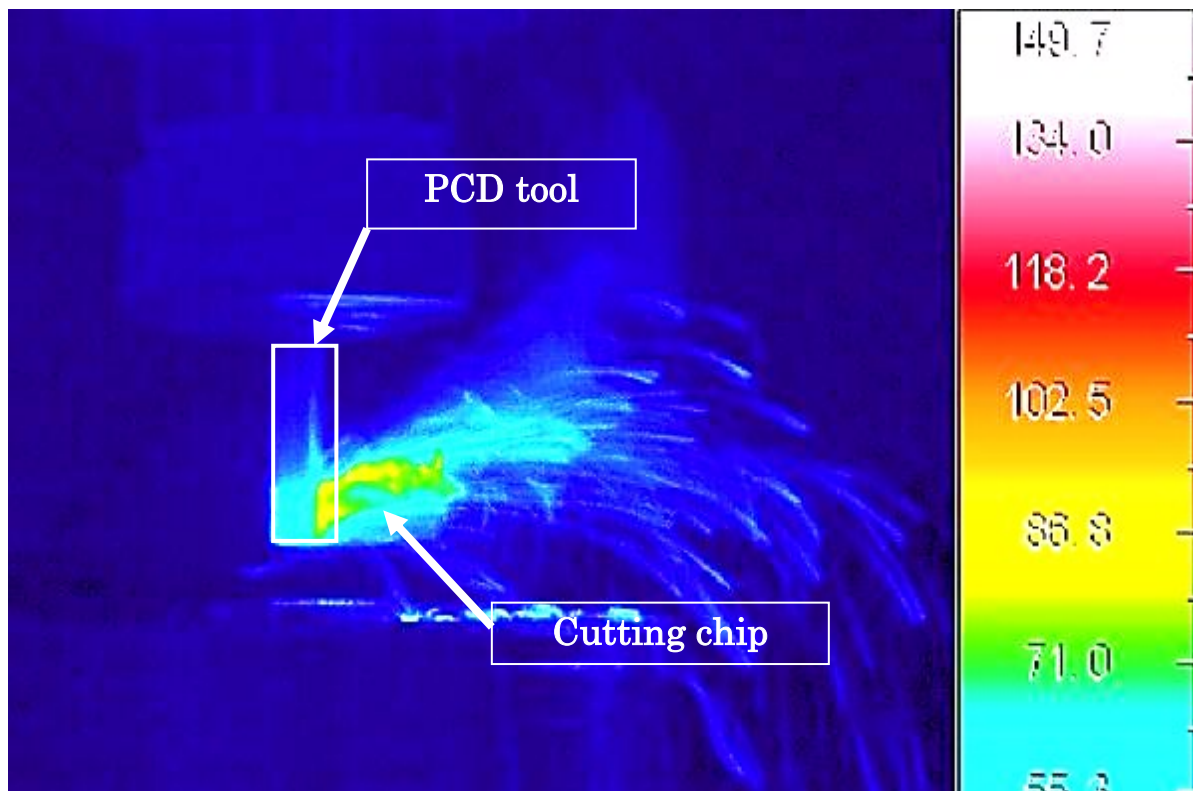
Cutting temperature measured by thermography (Test piece A, thickness 8 mm, machined by PCD tool)
